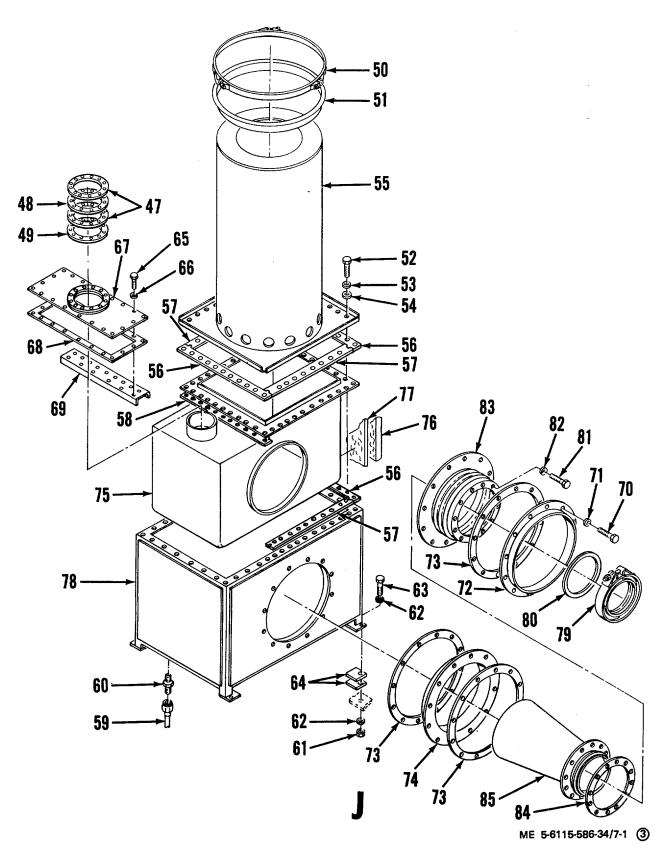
Bleed air and exhaust heating installation, exploded view. (sheet 3 of 3)
